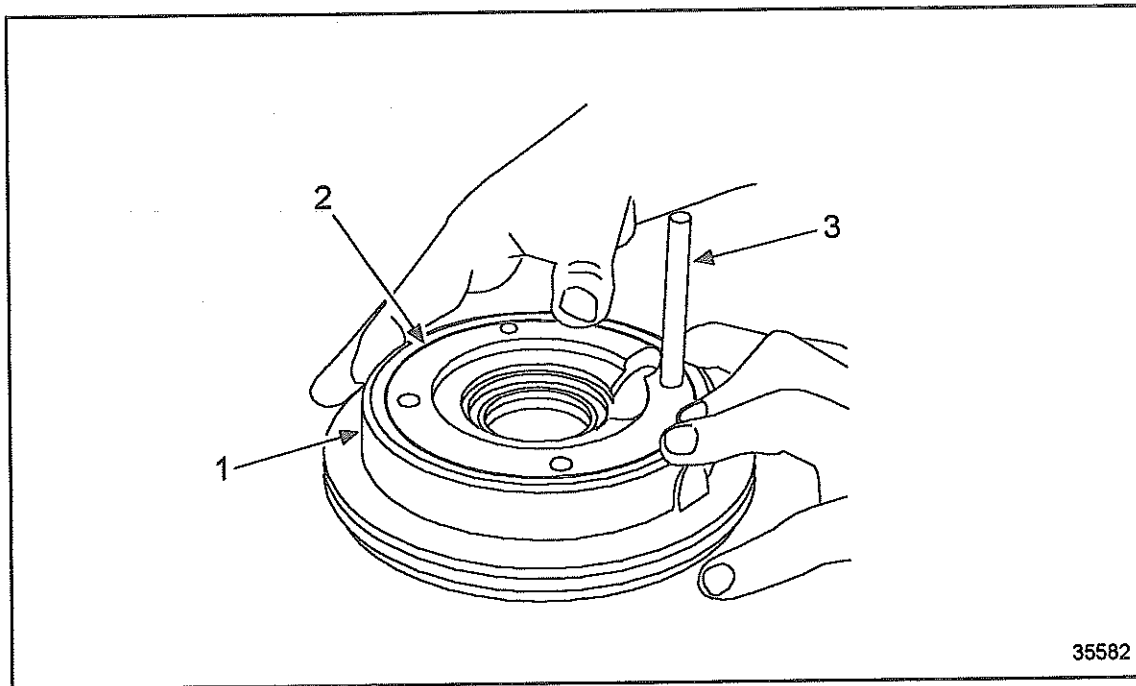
Inserting Snap Ring into Bearing Housing
